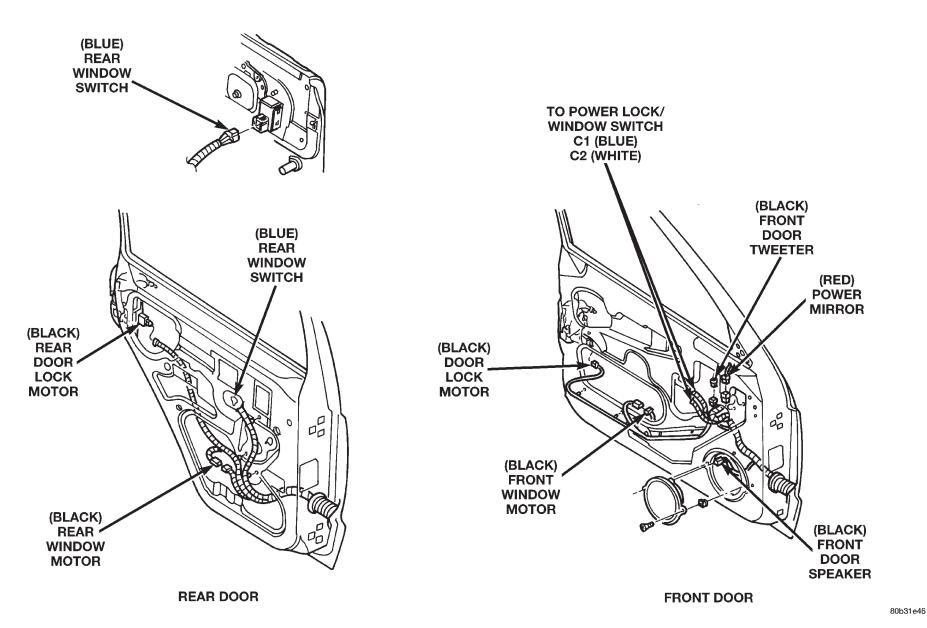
Front and Rear Doors (Left Side Shown, Right Side Similar)
